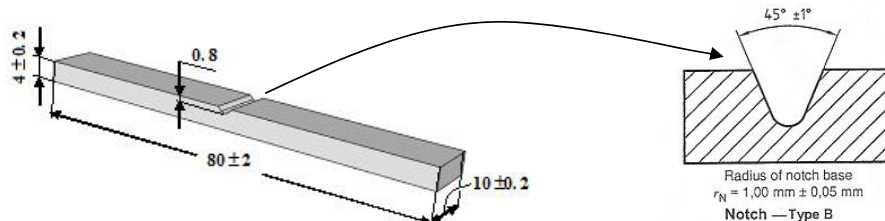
Shape and dimensions of the composite specimen used in Charpy test
